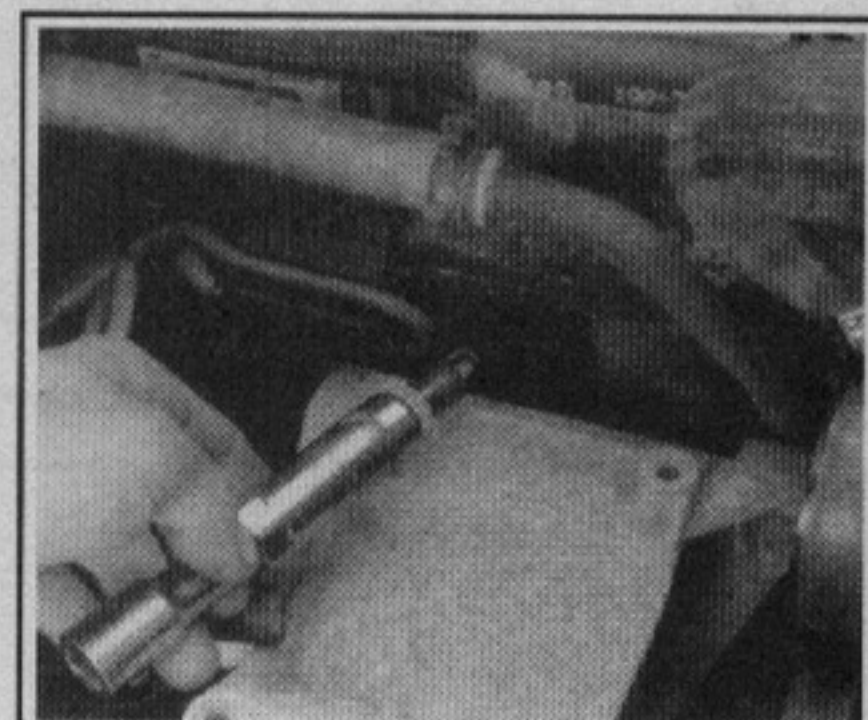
Loosen, unthread and remove the spark plug using a socket and extension
